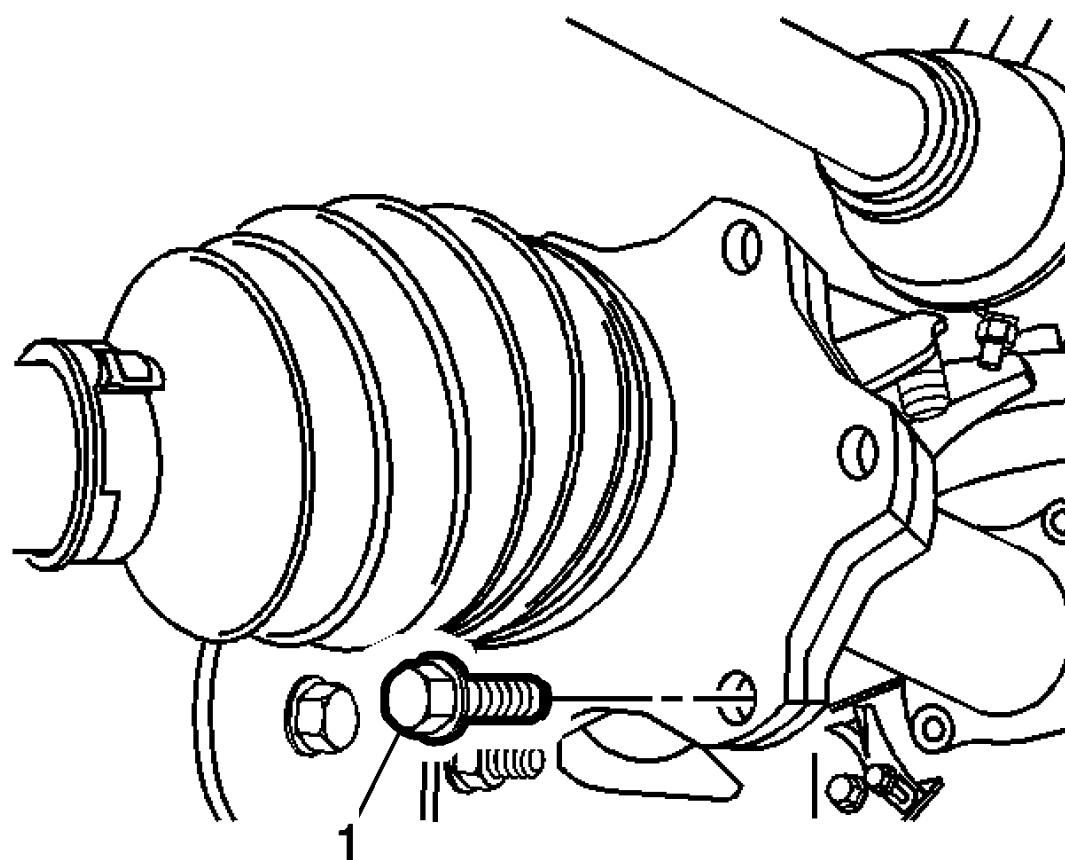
View Of Wheel Drive Shaft Inboard Flange Bolt - Front Drive Axle
